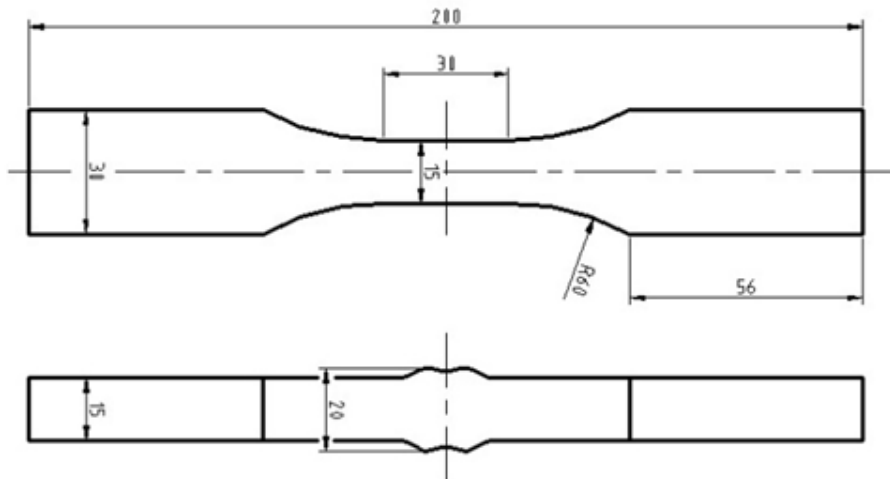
Shape and geometry of the HCF test specimens for butt welded joints (BWJ).
